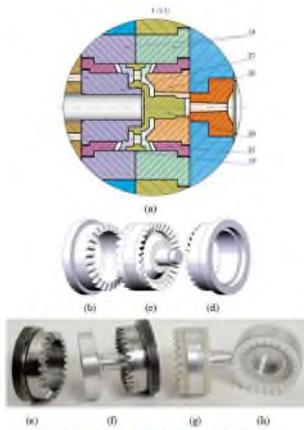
Pressure injection molding form: (a) - the local section of the wheel-satellite forming node of the 2K-H precessional gear; (b), (c), (d), respectively, 3D views of the molds with tooth profiles of the teeth and the wheel-satellite; (e), (g), (f), (h) - respectively, manufactured samples of dies, crank shaft and satellite wheels.
